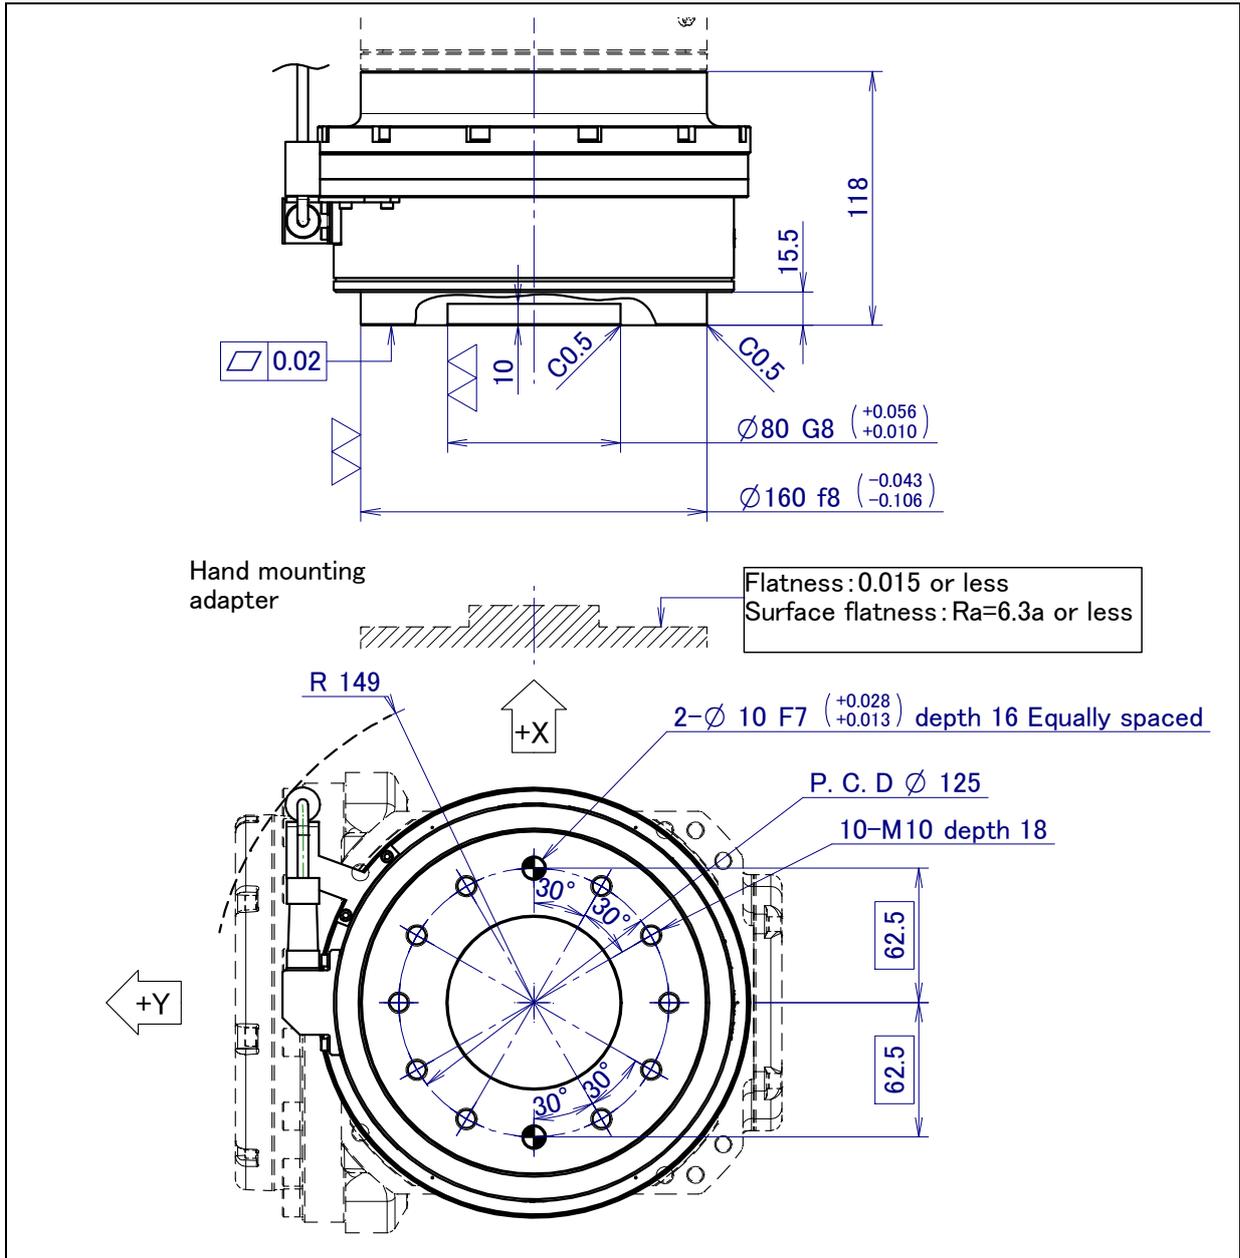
(d) Wrist section end effector mounting surface (FS-250iA standard adapter)
